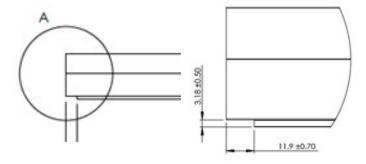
Measuring and marking the cope dimensions in a Tate Grid extrusion.
